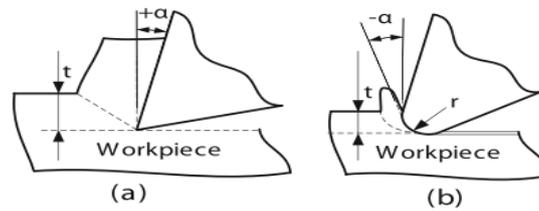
(a): Systematic cutting edge (a) macro cutting (b) micro cutting [22]
